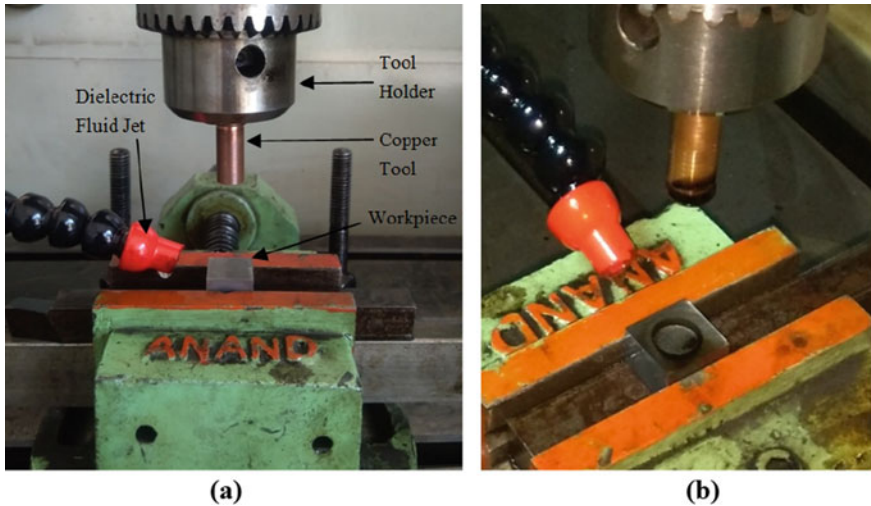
a Machining setup, b Tool and W/P condition after machining
